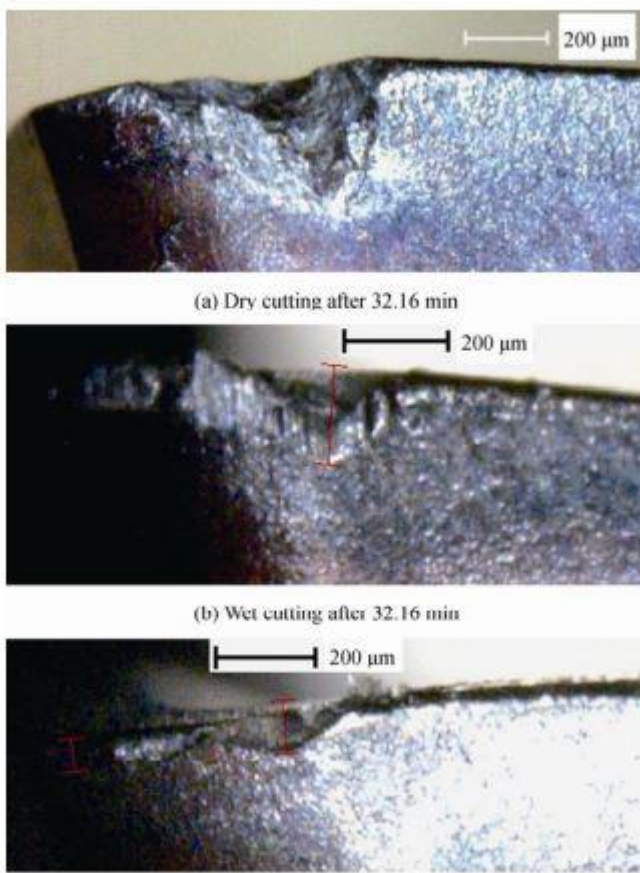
Flank wear for dry, wet and MQL machining after 32.16 min. [22]
